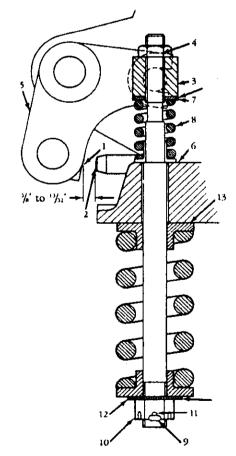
After assembly, draft control spring and spindle must be adjusted as shown.
